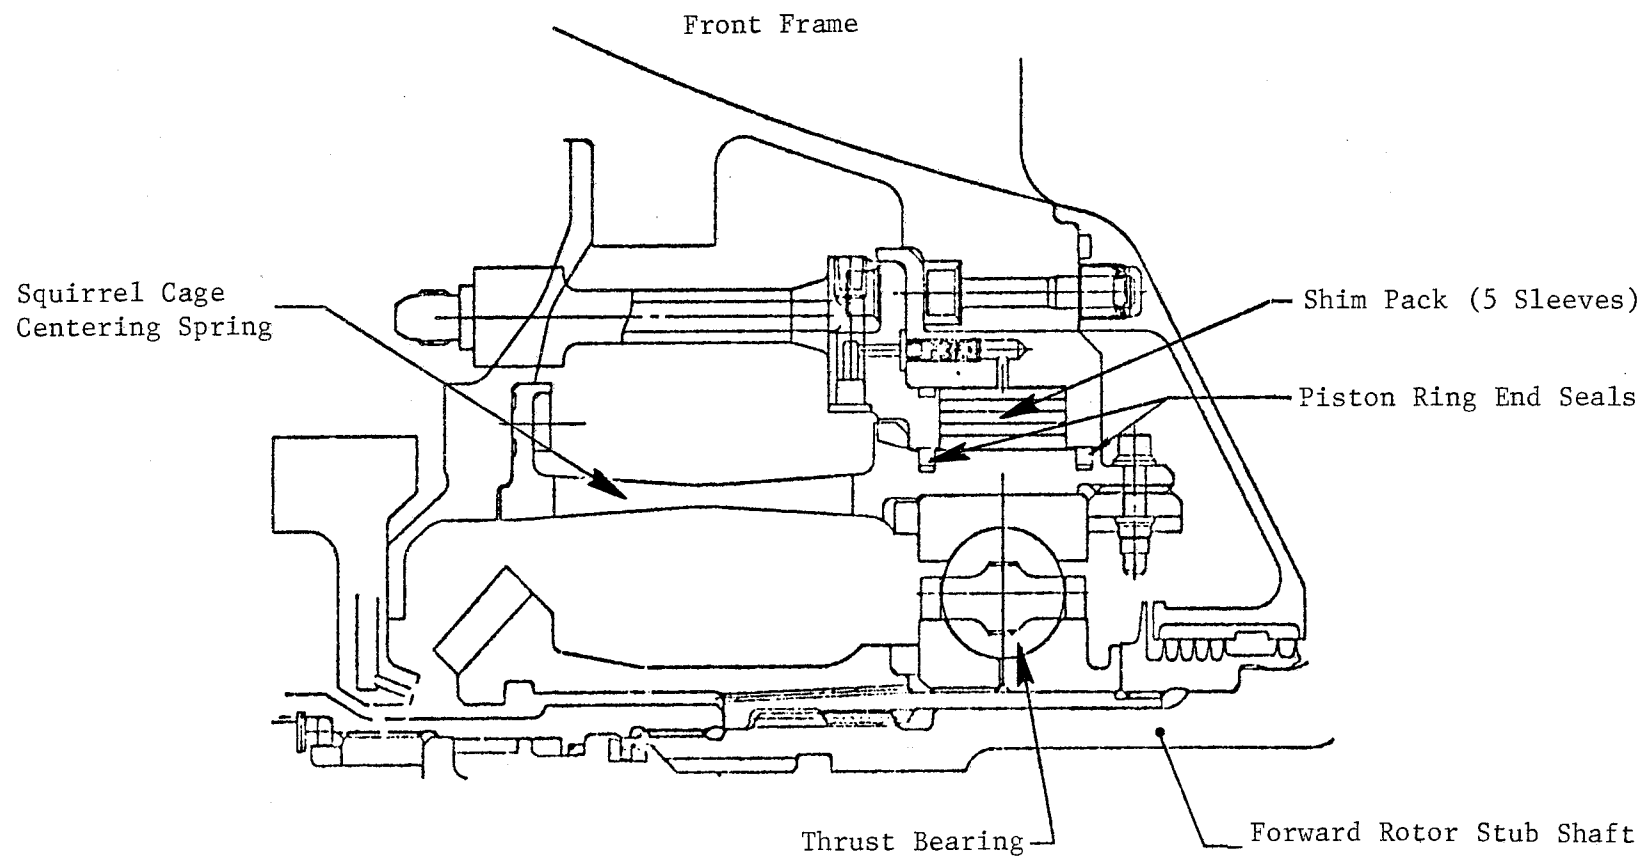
Forward Rotor Support and High Load Squeeze Film Damper.
